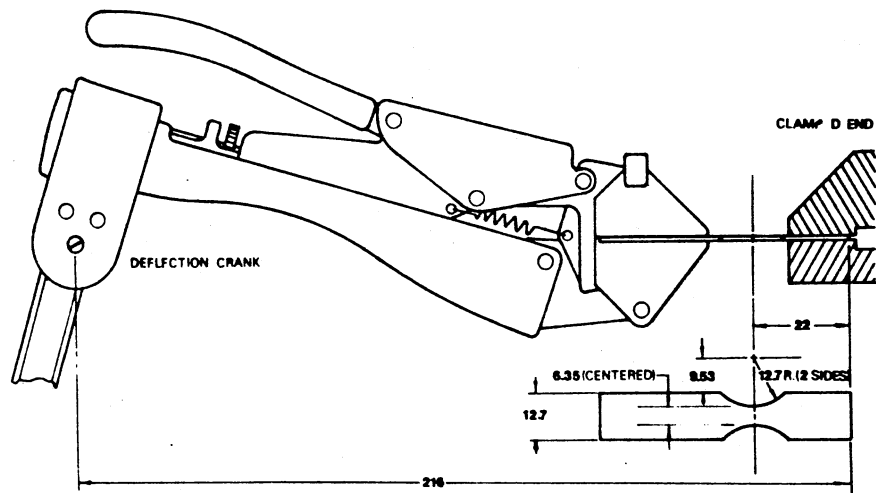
Sample Geometry of Finalized Test Specimen With Schematic of Its Mounting in Bending Machine (All Dimensions in mm)
